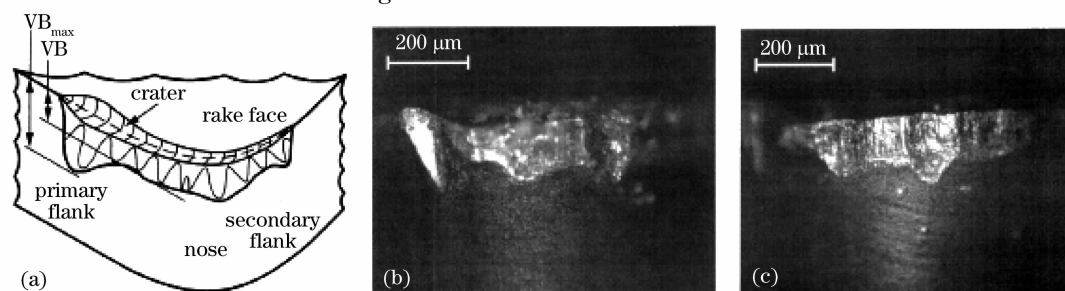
(a) Schematic of tool wear; (b) flank face; (c) nose during LAM of PSZ^[53]
